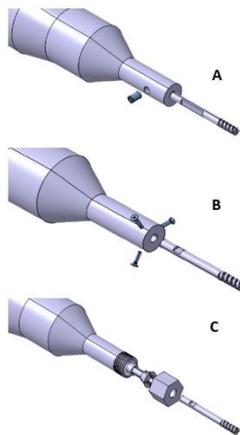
Connection mechanism of cutting tool by using A) a screw B) three screw C) cone collet
